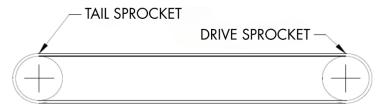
Chain Routing for End Drive Slat Conveyor
